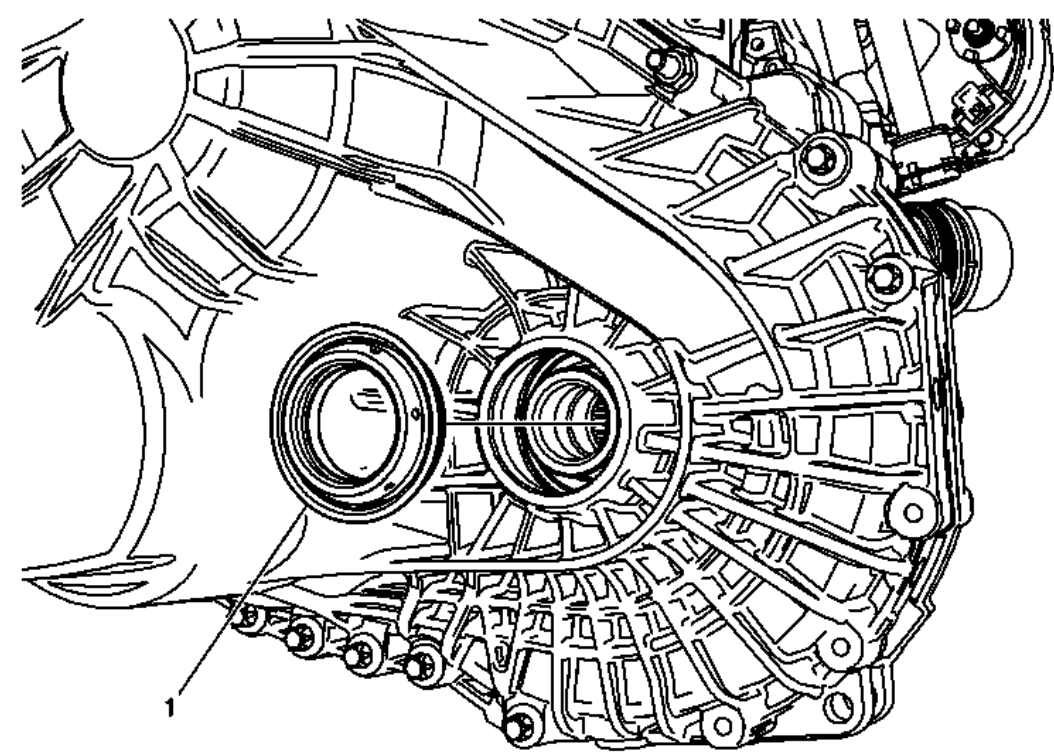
Front Wheel Drive Shaft Seal - Left Side
